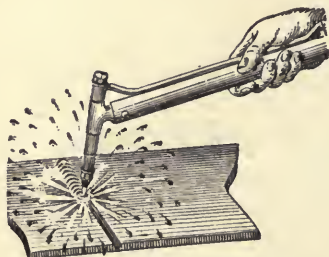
Wrong method of holding the blowpipe. The blowpipe should be held as near as possible in the direction of the edges to be welded and not perpendicular to the line of welding.
